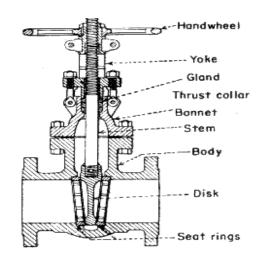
Gate Valve (MechanicalQuiz, 2013)
